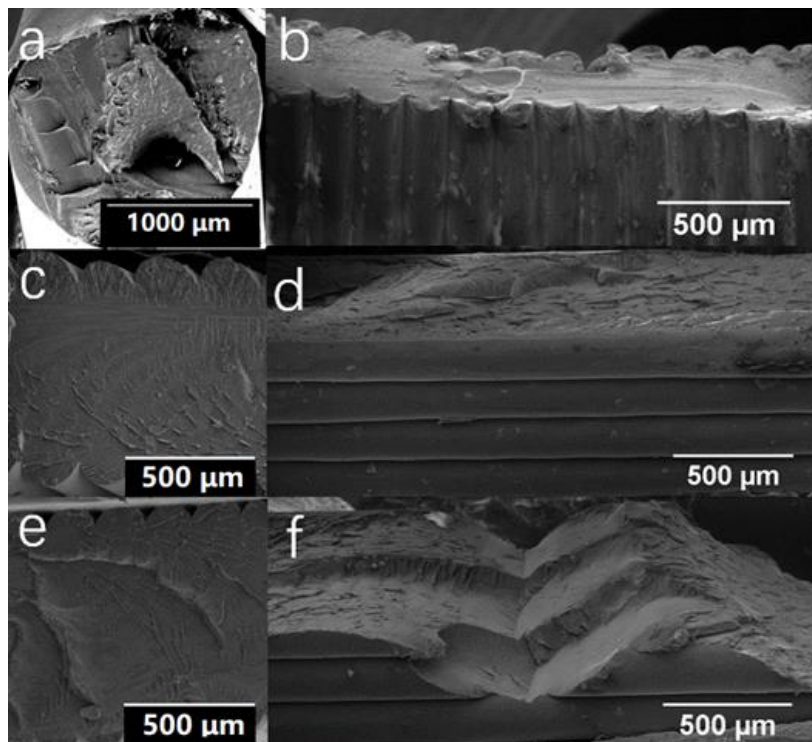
4. (a) Cross section of Ultem 1010 filament, (b) Cross section of horizontal control sample break with tensile test; (c) Freeze fracture surface, and (d) tensile test failure surface of vertical control sample (e) Freeze fracture surface and (f) tensile test failure surface of 1.6 W laser sample.
